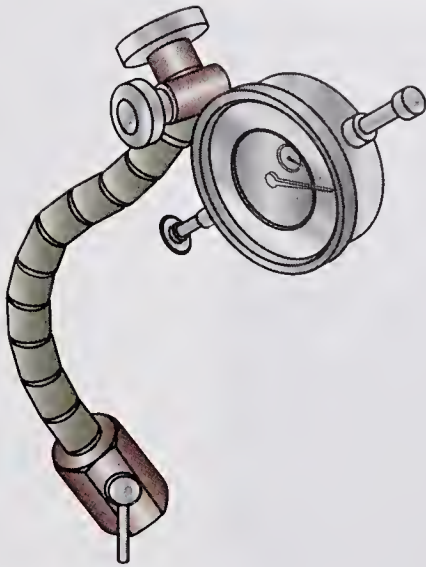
Dial indicator designed for ball joint measurement.
